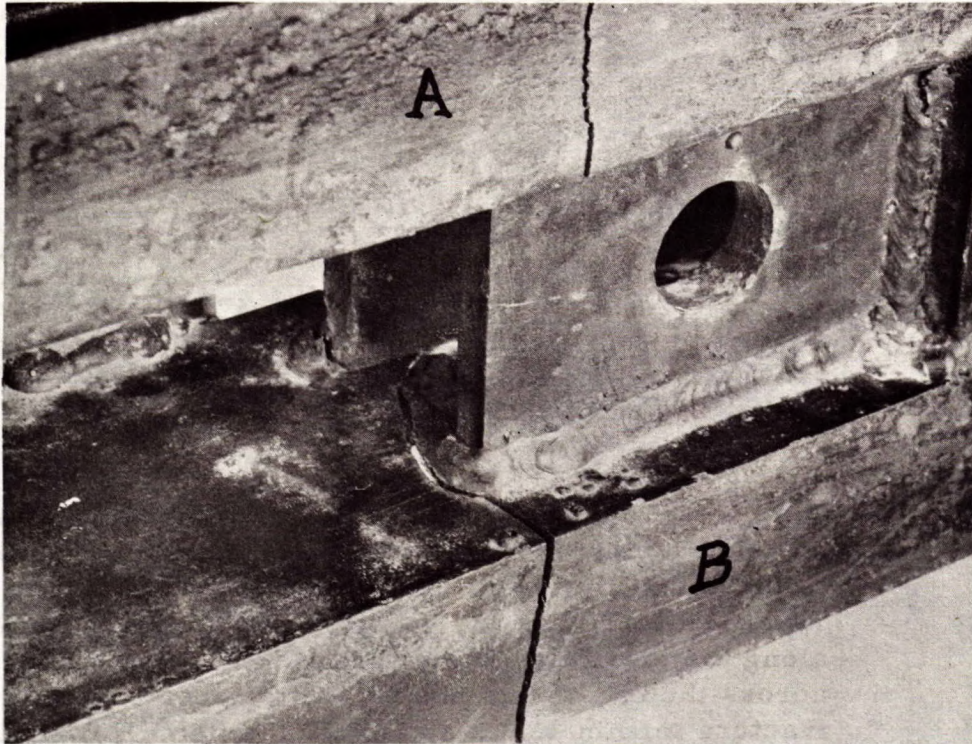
Showing the lower fracture path in channel B, looking from the bottom side. Note that the fracture path follows along the toe of the fillet weld made around the end of the central connecting plate joining it to the inner surface of the channel.
